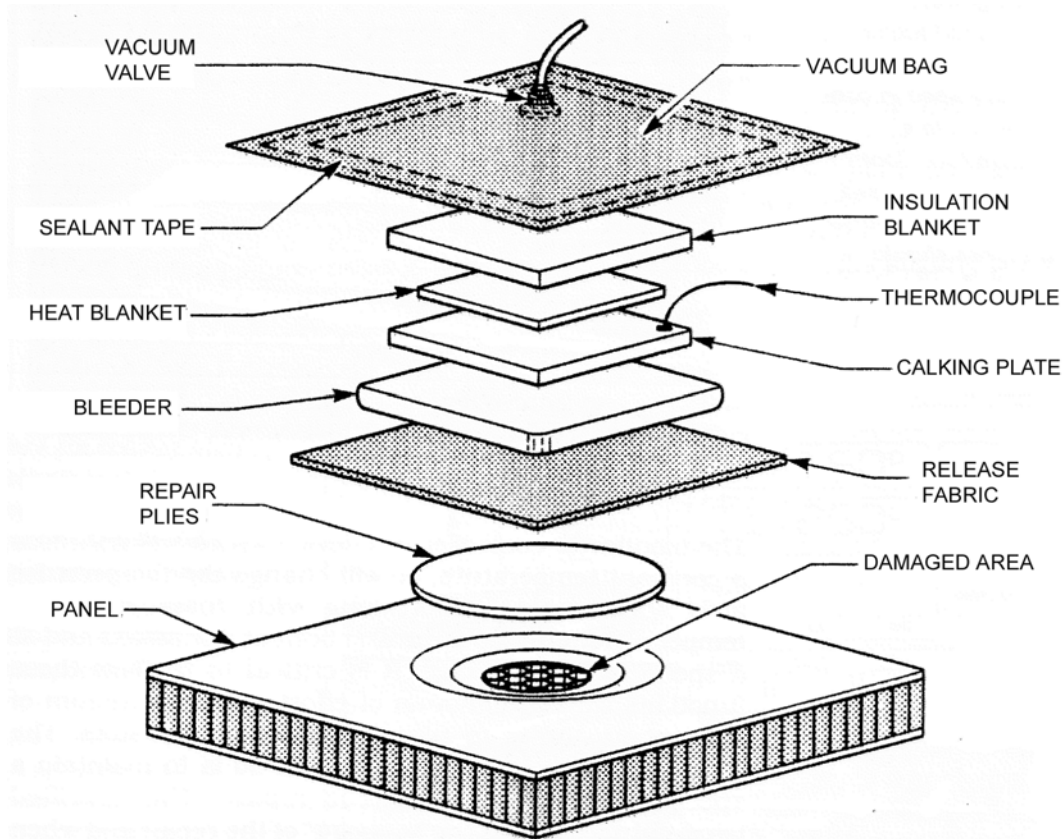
, A typical bagging operation with the use of a heat blanket.
